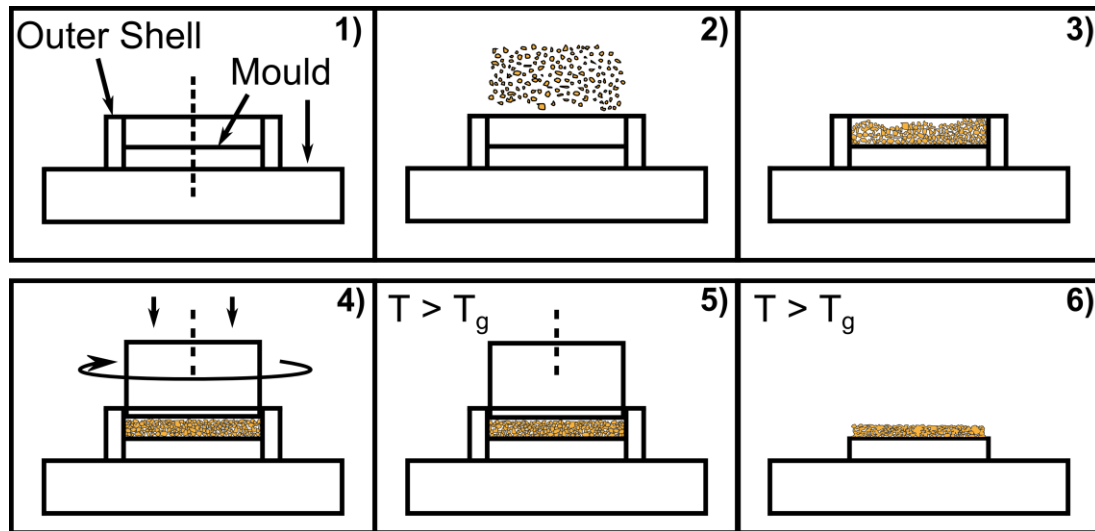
Schematic of the sintering process. From top left to bottom right: The mould is (1) assembled. The powder is then (2) filled into the mould, (3) brought to tap and knock density, (4) compressed using the compression cylinder that is rotated several times, then (5) heated with a cylinder in the pre-sintering step, (5) cooled with the cylinder in the cooling step and (6) sintered with removed cylinder and upper part of the mould.
